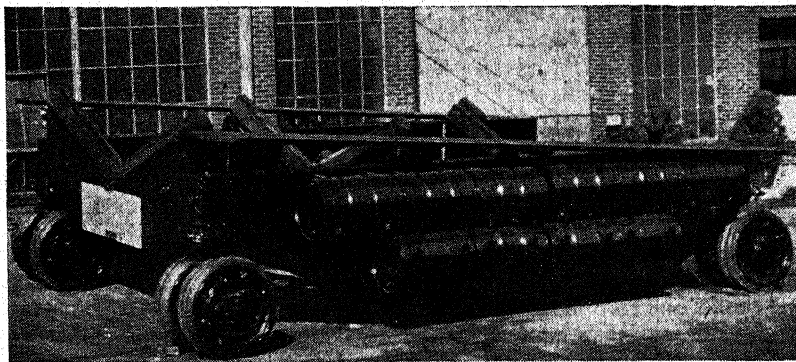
Beaching gear for large aircraft fabricated by arc welding at 31.7% cost savings.
